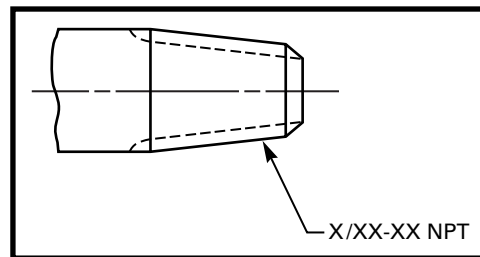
TAPER THREAD DESIGNATIONFIG. 20 SPECIFYING EXTERNAL TAPER THREAD TYPE AND SIZE
